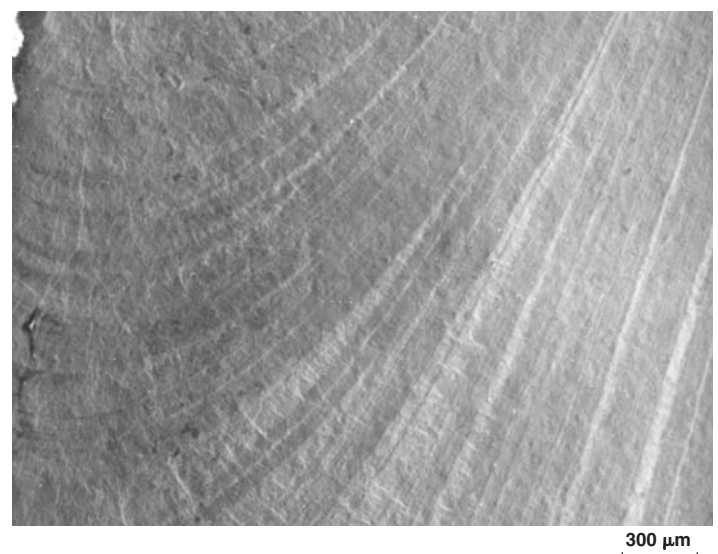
Well-defined beach marks on the fracture surface
